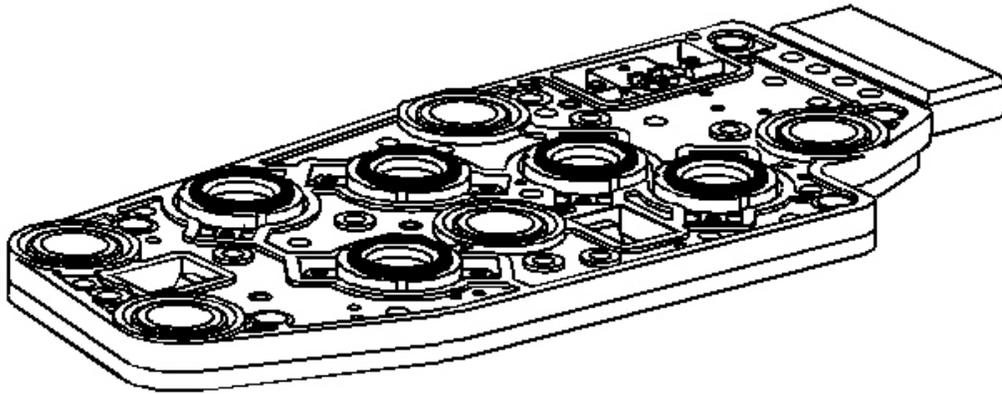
Inspecting Transmission Fluid Pressure Switch
